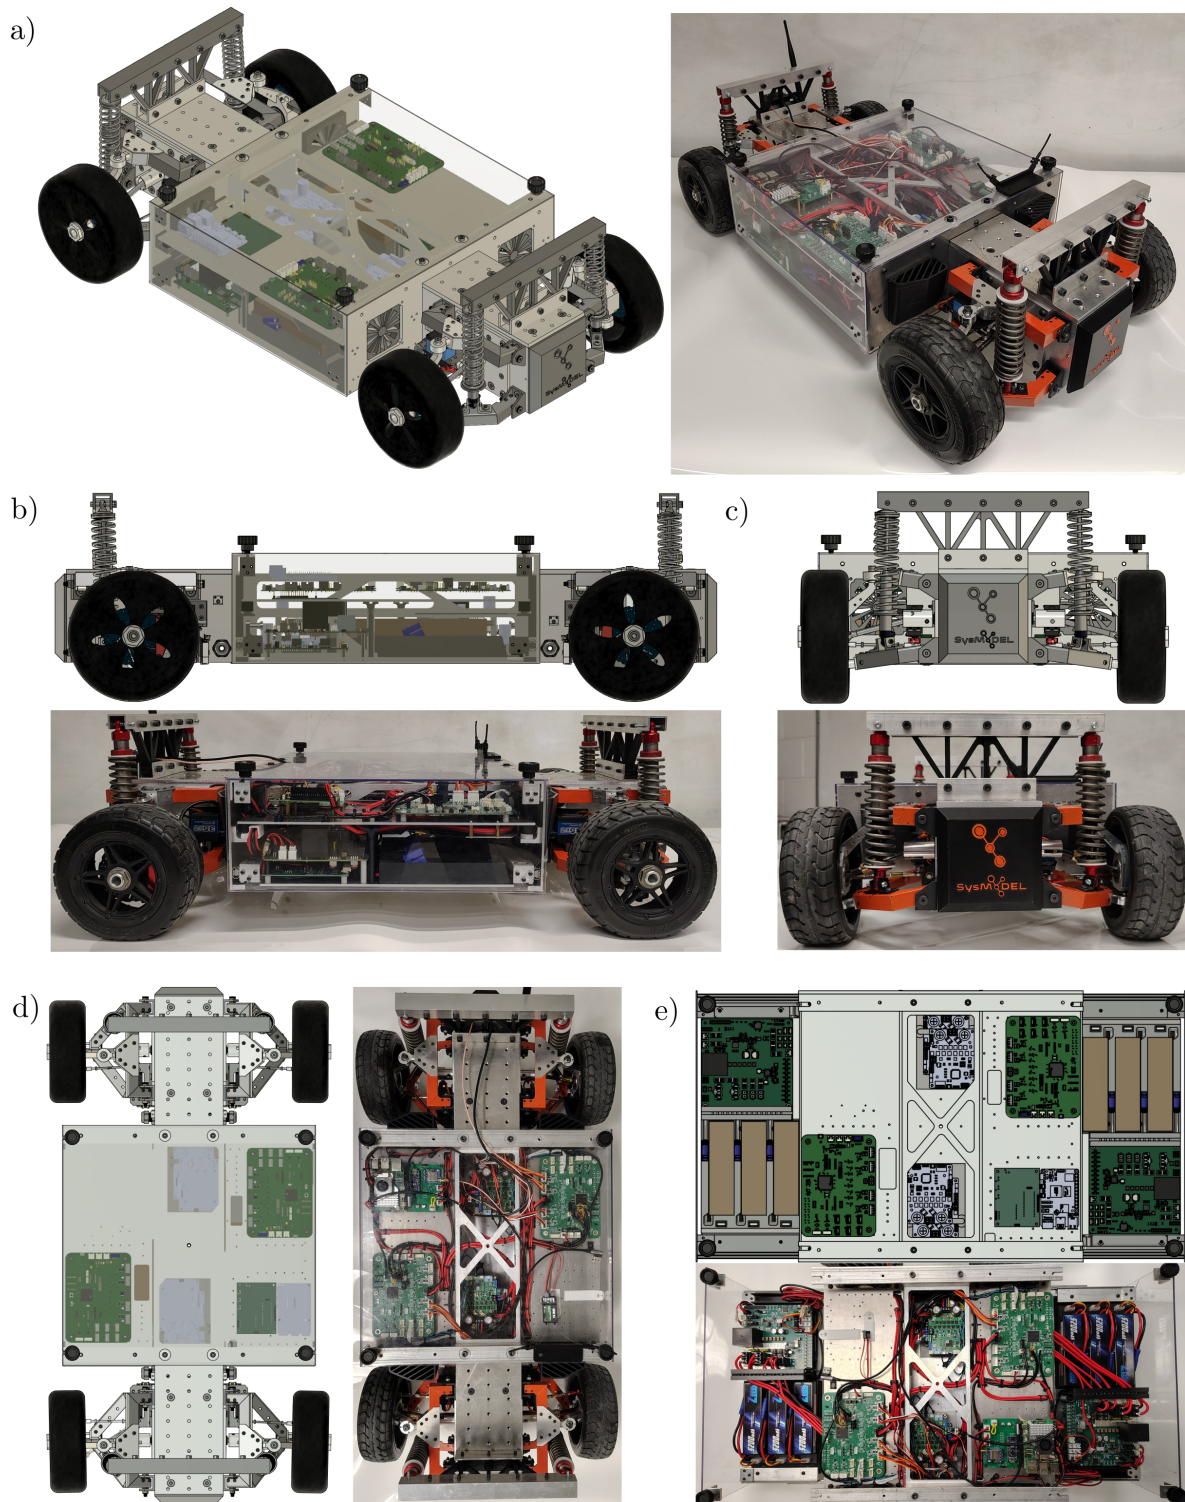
Developed MARV platform outlining the a) isometric, b) side, c) front, and d) top view of the CAD model and manufactured two axle vehicle. e) Displays the chassis's body components and the wiring required to connect the mechanical, electrical, and embedded subsystems.
